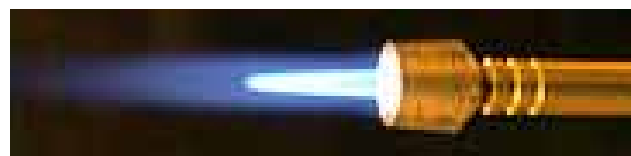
Oxygen Rich Butane Torch Flame [3].
